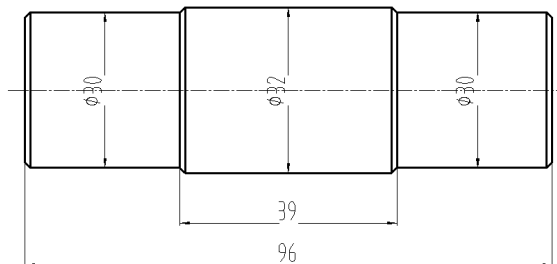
Roller shaft (a 0.4%C-1.05%Cr steel and dimensions in mm)
